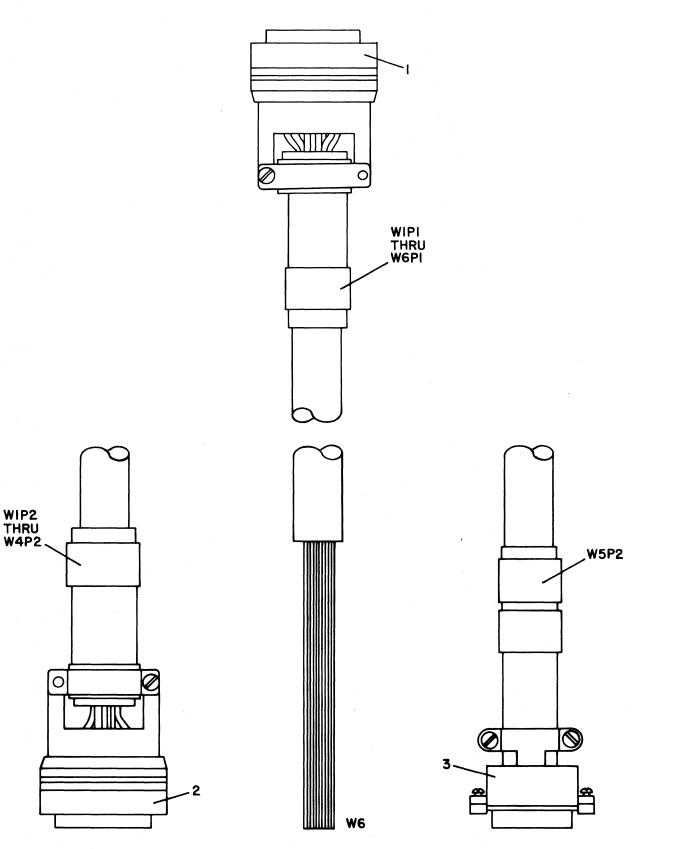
POWER CABLE ASSEMBLY (W1 THRU W6)
